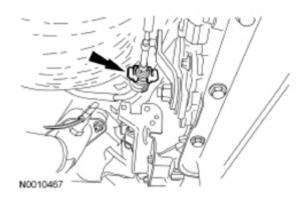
Locating Selector Lever Cable Retaining Clip Courtesy of FORD MOTOR CO.
